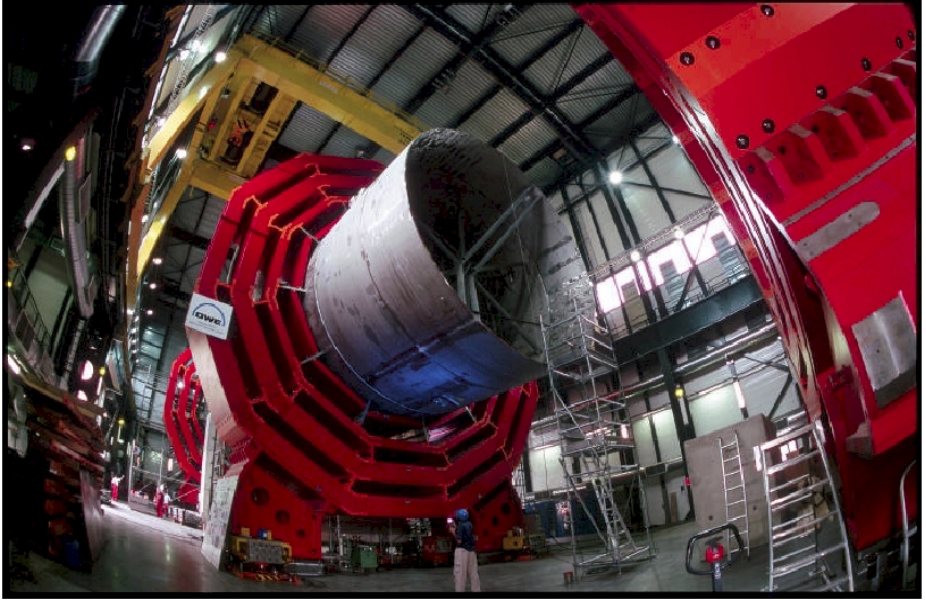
Assembly of the Magnet Barrel Yoke at Point 5. The picture shows the central wheel YB0 supporting the 13 m long cylinder making the outer shell of the vacuum tank for the superconducting coil. Two other wheels are visible on the picture
